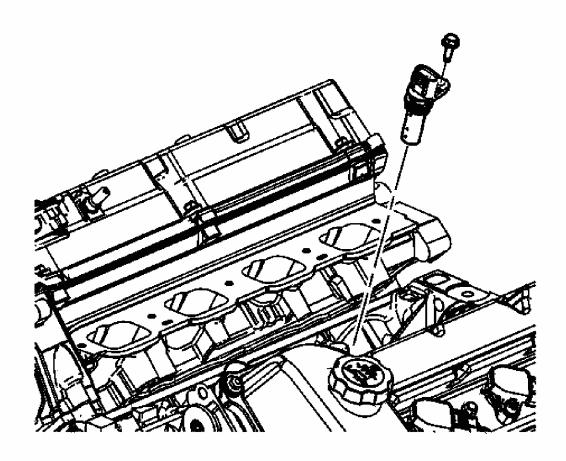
Locating CKP Sensor Courtesy of GENERAL MOTORS CORP.
